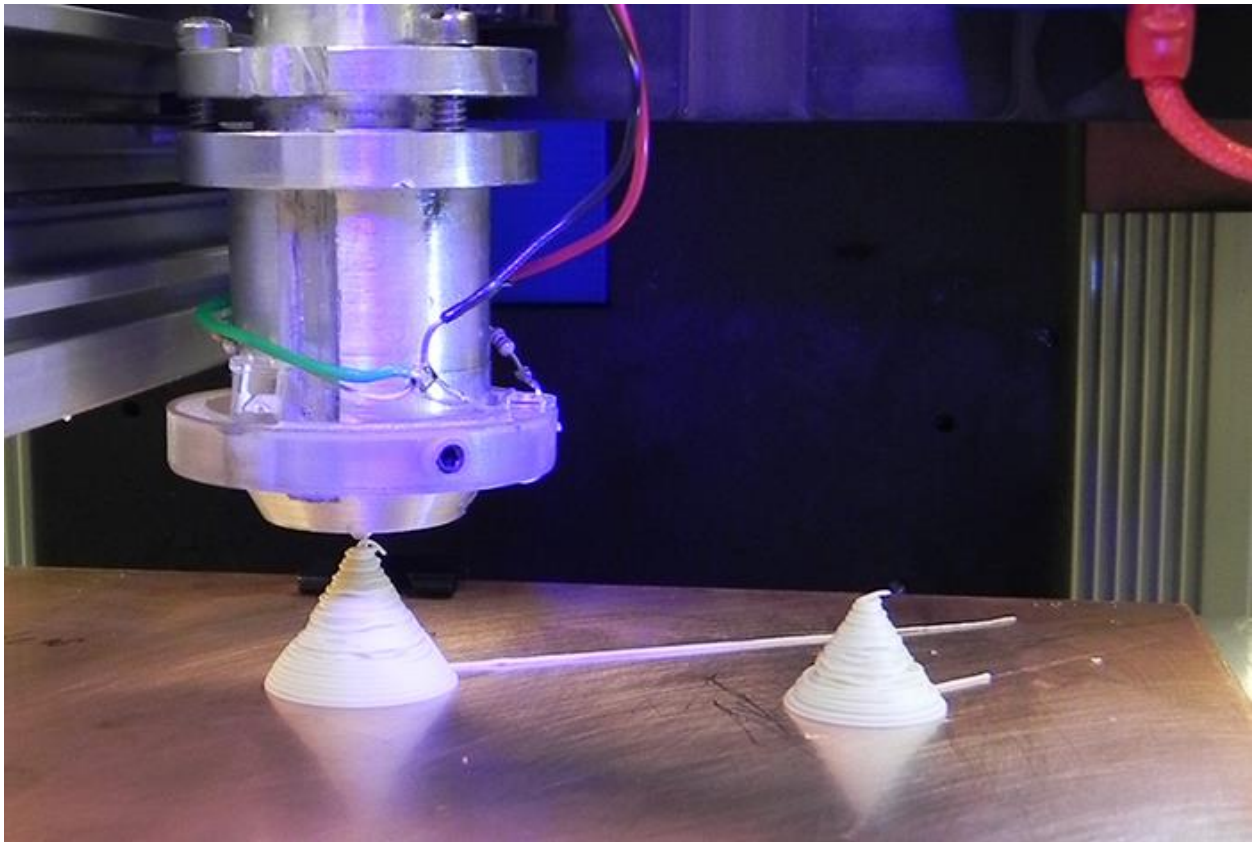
Los Alamos 3D Printed Explosive Cones [13]
